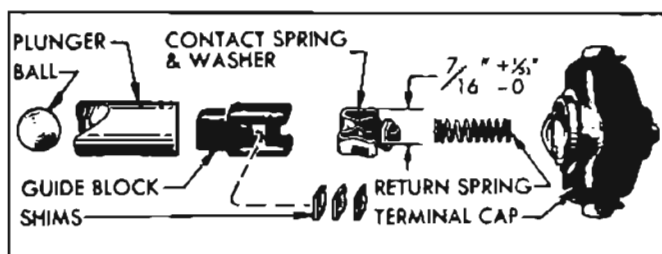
Carter Accelerator Vacuum Switch Parts
